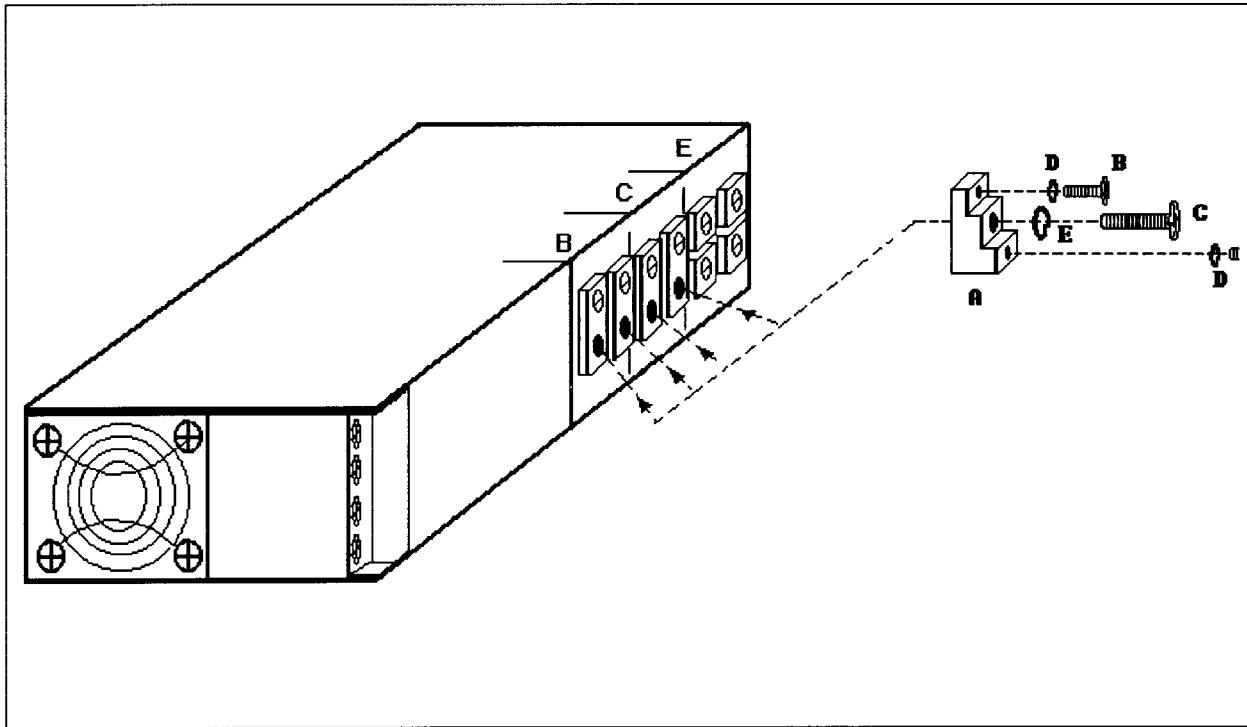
Fitting Parts from Adaptor Kit to PSU Module Low-voltage Connector Block
